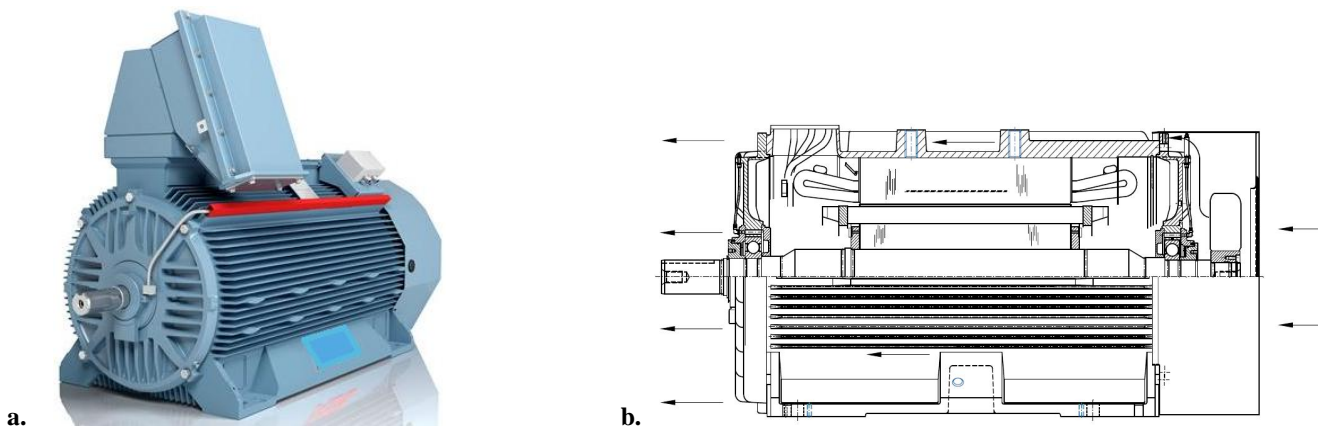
a) Rib-Cooled Induction Motor with Antifriction Bearings, b) Typical Cross-Section of a Totally Enclosed Fan Cooled (TEFC) Motor.
